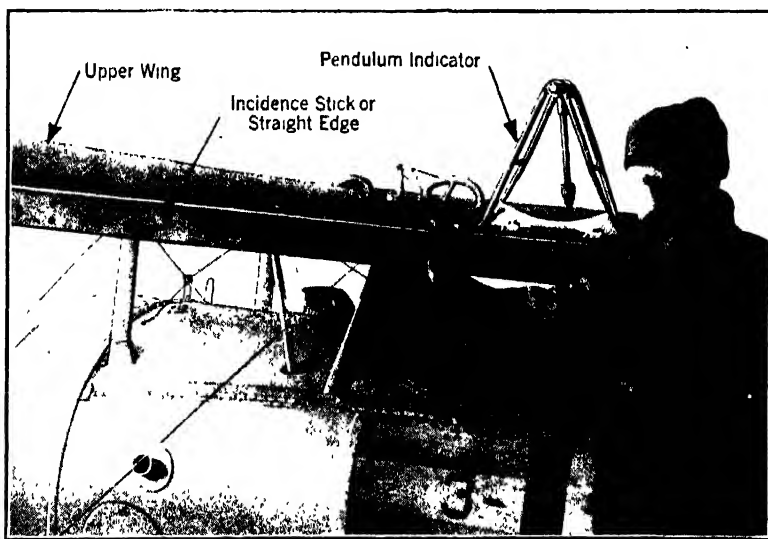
How Pendulum Indicator and Straightedge are Used to Check Incidence of Upper Wing.
